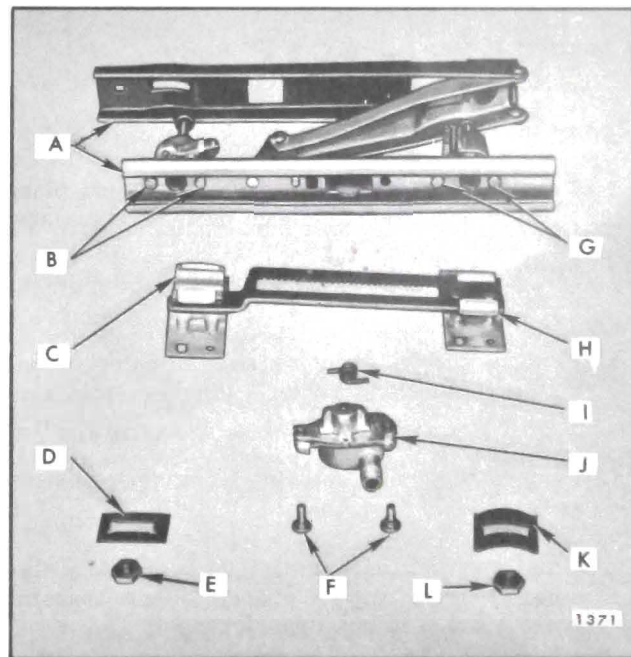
Six-Way Seat Adjuster Components - "B & C" Styles
